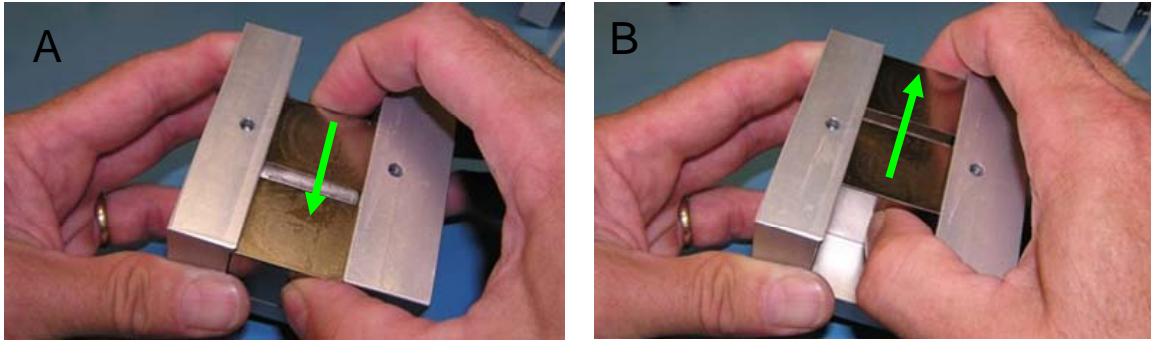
Photographs illustrating diverter block movement during valve reassembly. The diverter block should move freely between the upper and lower housing plates.
